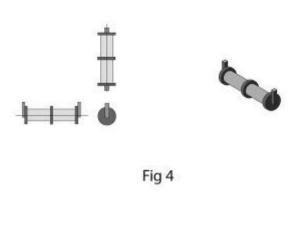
The hose guide roller is another piece of plastic dowel with small pieces of plastic cut as mounting brackets. This will be mounted on the back of the cart to prevent dragging the hose over the end frame, side frame, or the toolbox.
